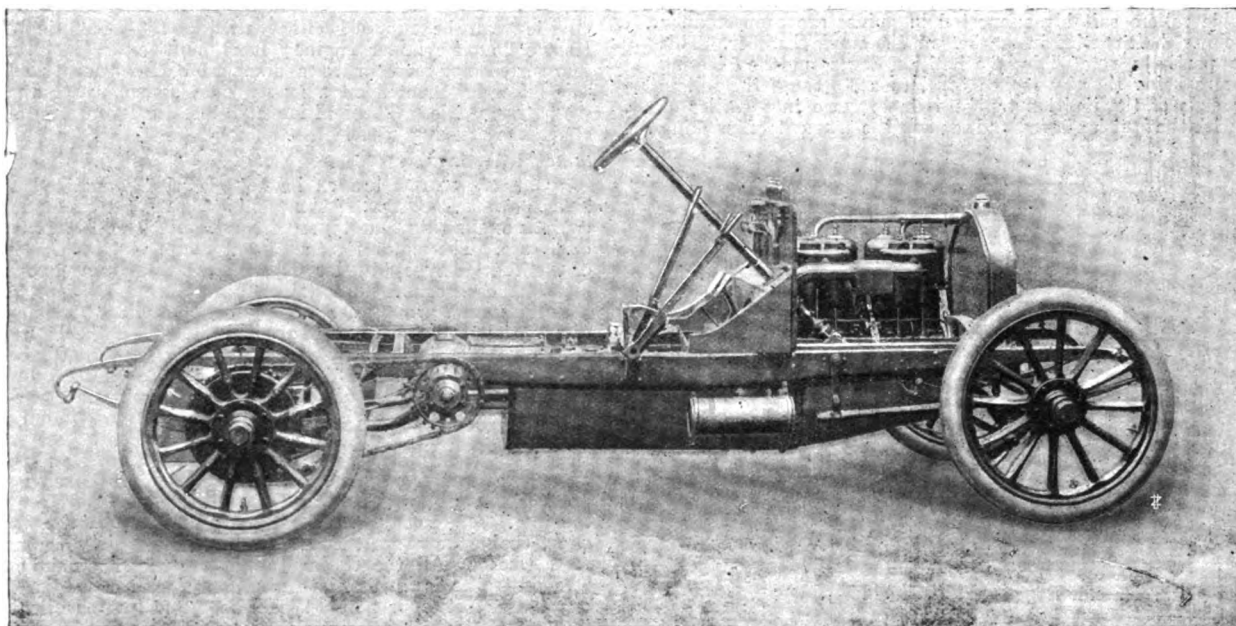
Chassis of Isotta-Fraschini 28-35 h.p. Car.
